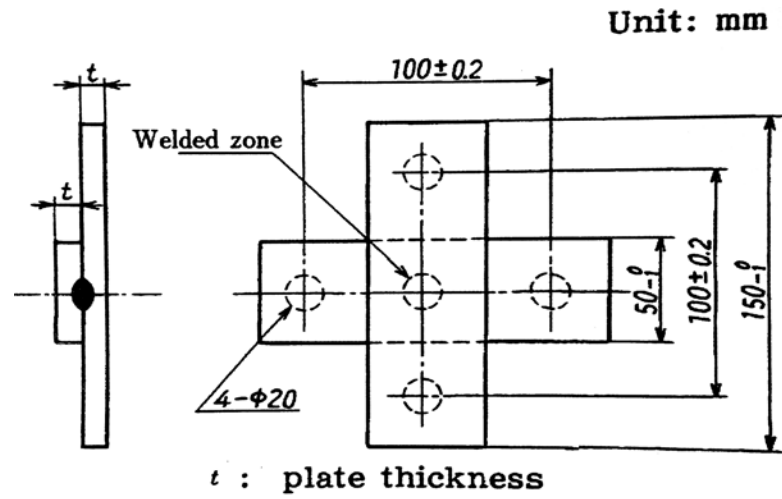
Shape and dimensions of CTS test pieces from JIS 3137.
